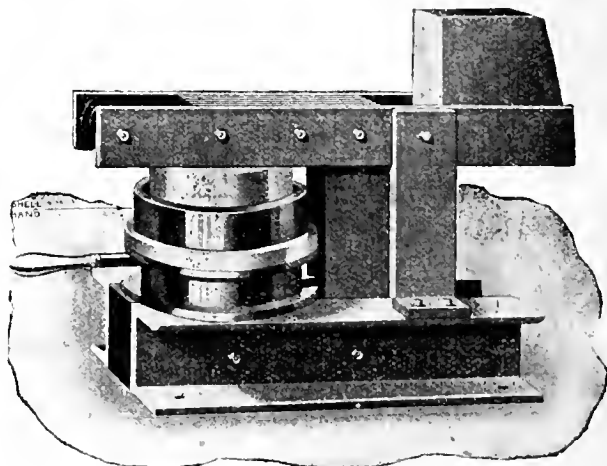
J. & P. SHELL-BAND HEATING TRANSFORMER.
